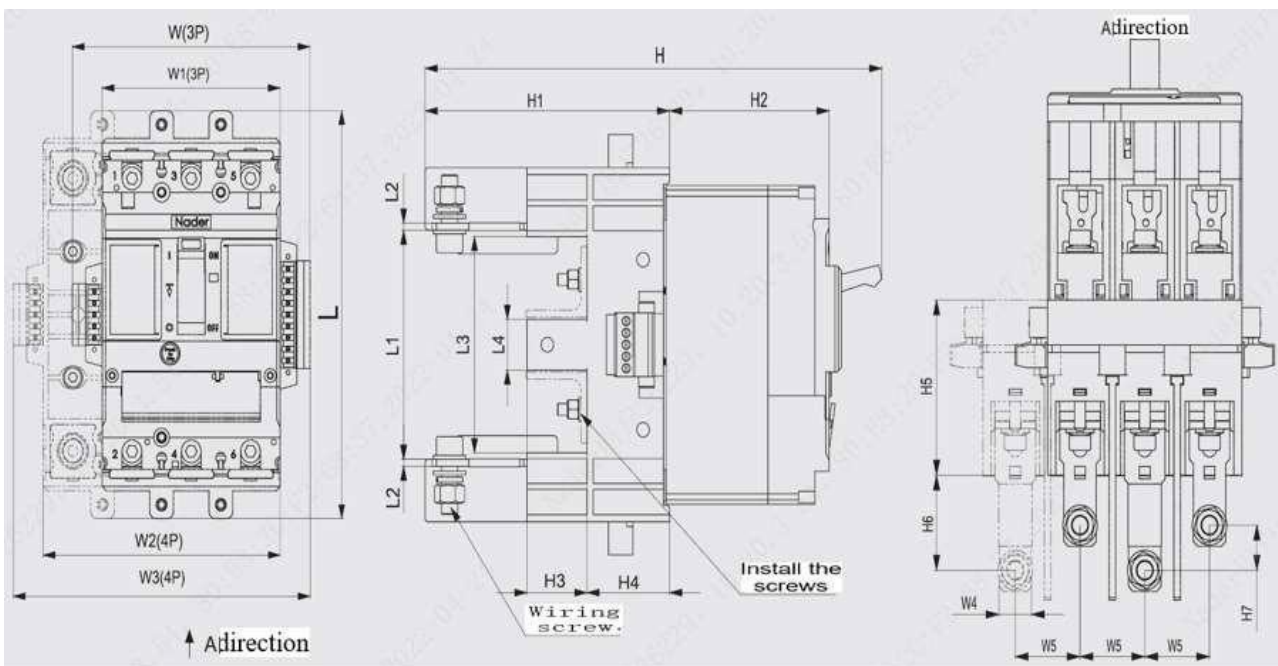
3P、4P Mounting hole dimensions of plug-in connections
